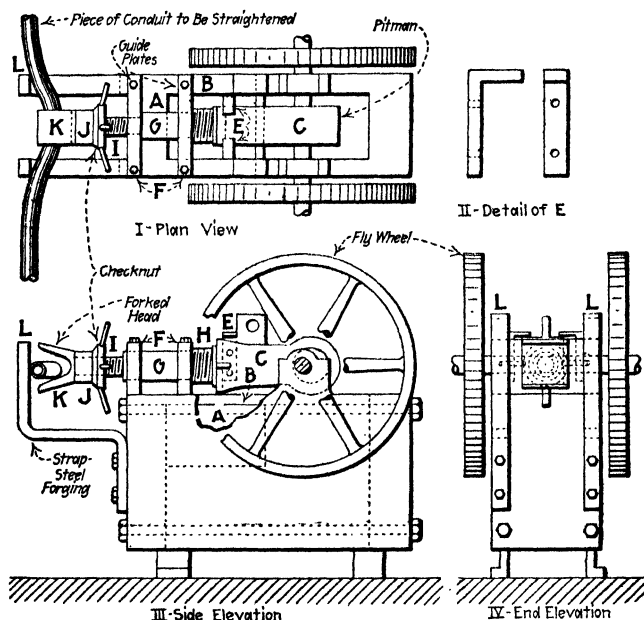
Showing how an old rock crusher was modified into a pipe straightening machine.
